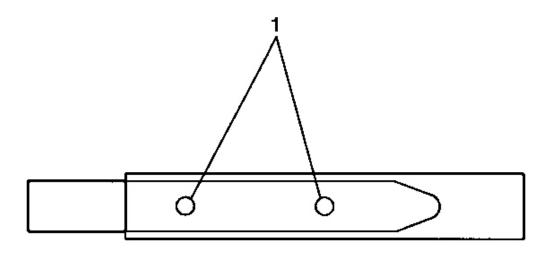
Inspecting Steering Shaft For Sheared Injected Plastic Courtesy of GENERAL MOTORS CORP.
